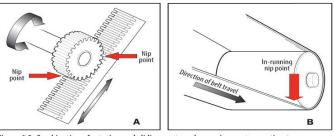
Combination of rotating and sliding parts and reversing parts, creating two in-running nip point hazards. (A) Rack and pinion gears. (B) Conveyor belt spool.
